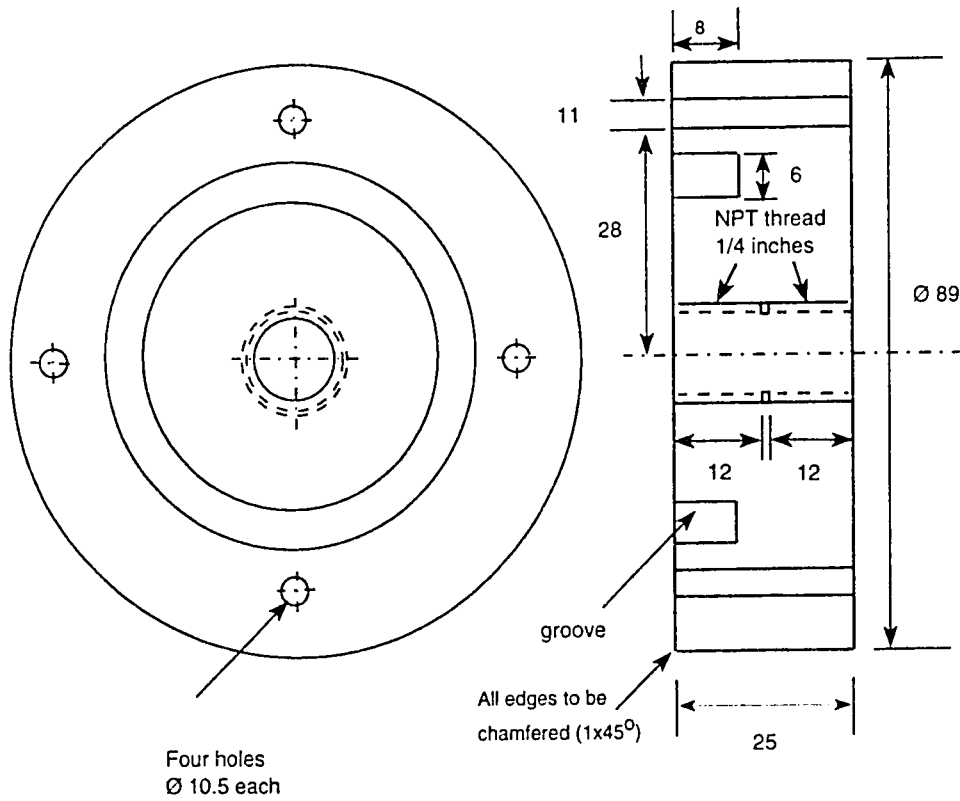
Drawing of plate B of 3/8 inch tube heat exchanger
